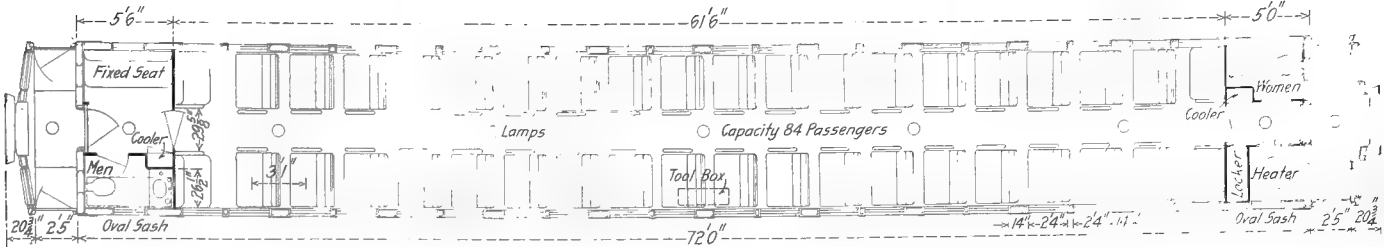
Floor Plan of Canadian Pacific Steel Day Coach.
